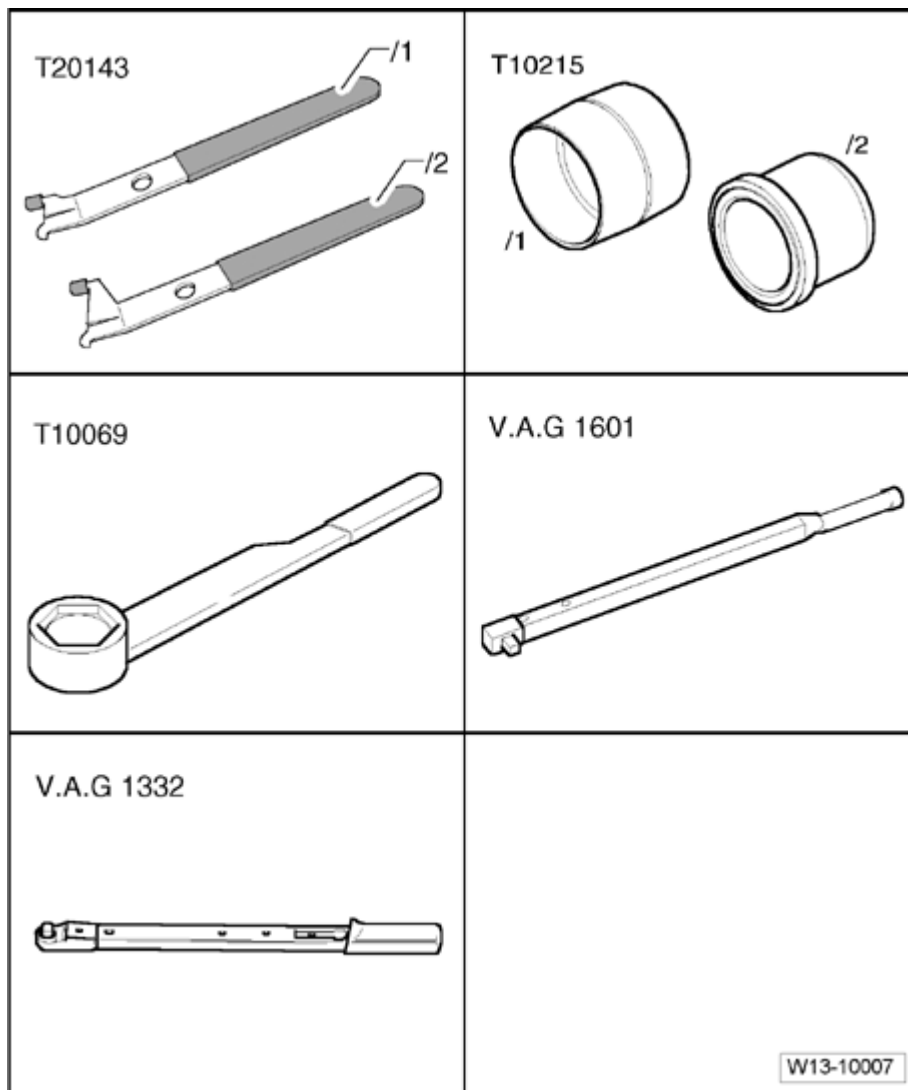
Identifying Special Tools - Crankshaft Seal (Vibration Damper Side), Replacing
